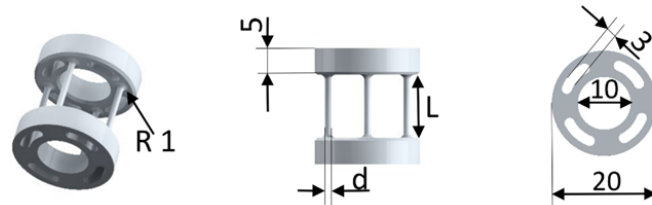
Structural design of the single strut specimen. The test specimen consists of two parallel areas (base and top) and four single struts. The single struts are arranged at an angle of 90 degrees to the base and top area. The crossovers between the base and top area to the single strut are produced with a radius of 1 mm.
